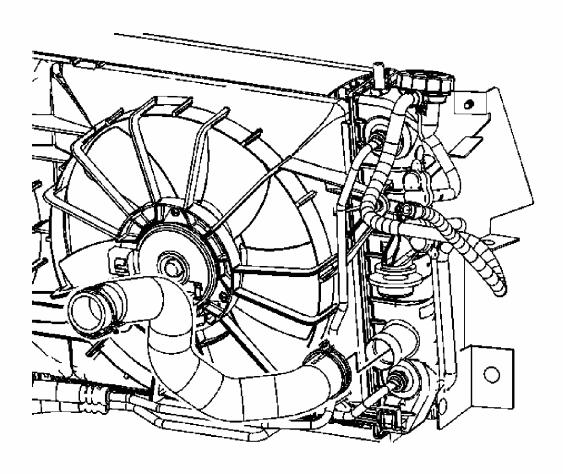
View Of Radiator Outlet Hose Courtesy of GENERAL MOTORS CORP.
